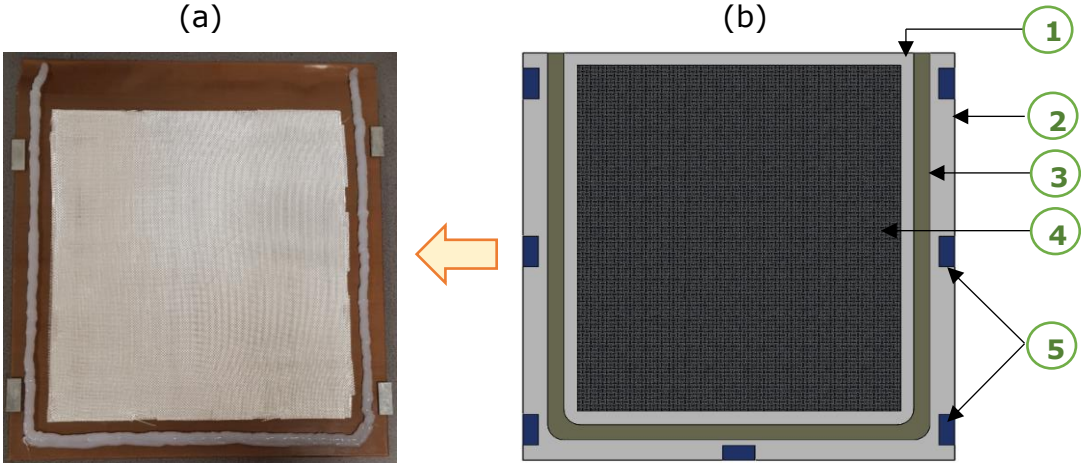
Glass sheet mould used for SMP and SMPC fabrication; (a) actual and (b) schematic
